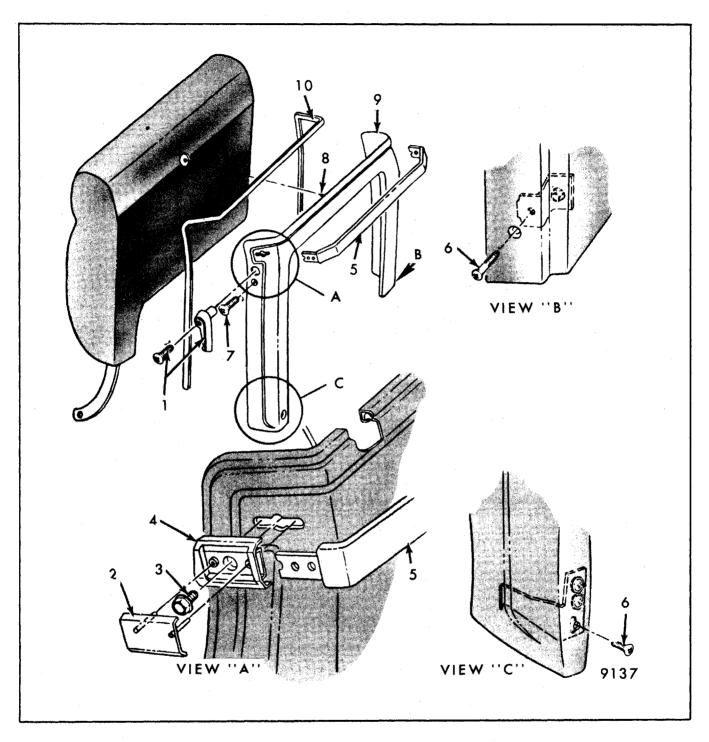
Front Seat Back Assist Strap and Panel Assembly - Cadillac Eldorado
